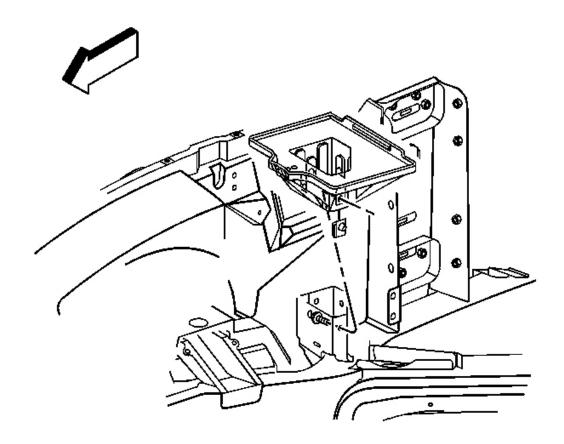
View Of Battery Tray Courtesy of GENERAL MOTORS CORP.
